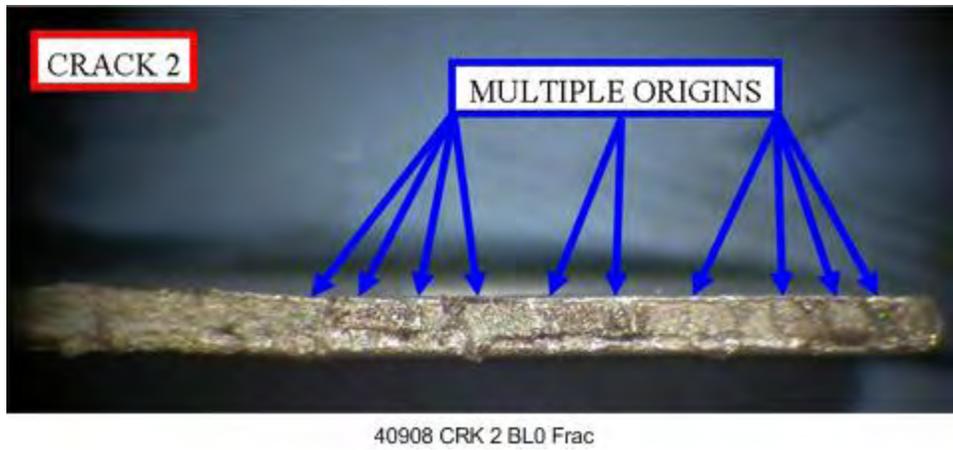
Fracture Face of Crack 2 on the Windshield Bracket BL 0
